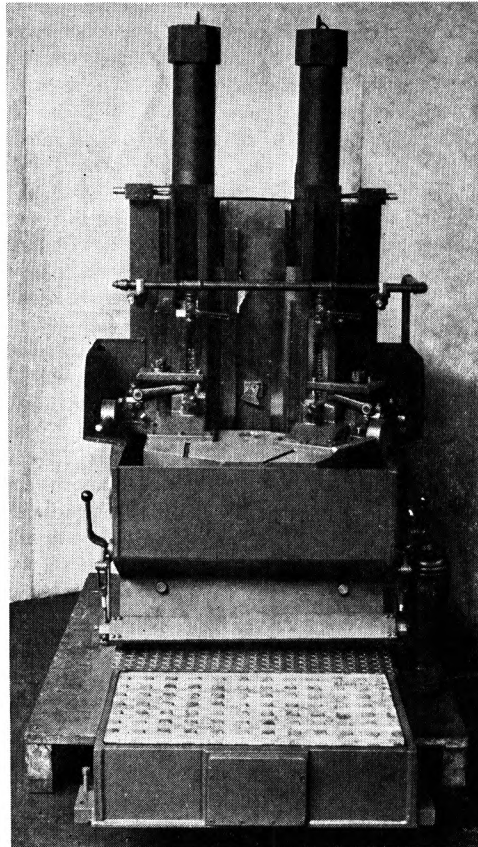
VERTICAL, HYDRAULIC, DUPLEX BROACHING MACHINE WITH AUTOMATIC INDEXING TABLE
